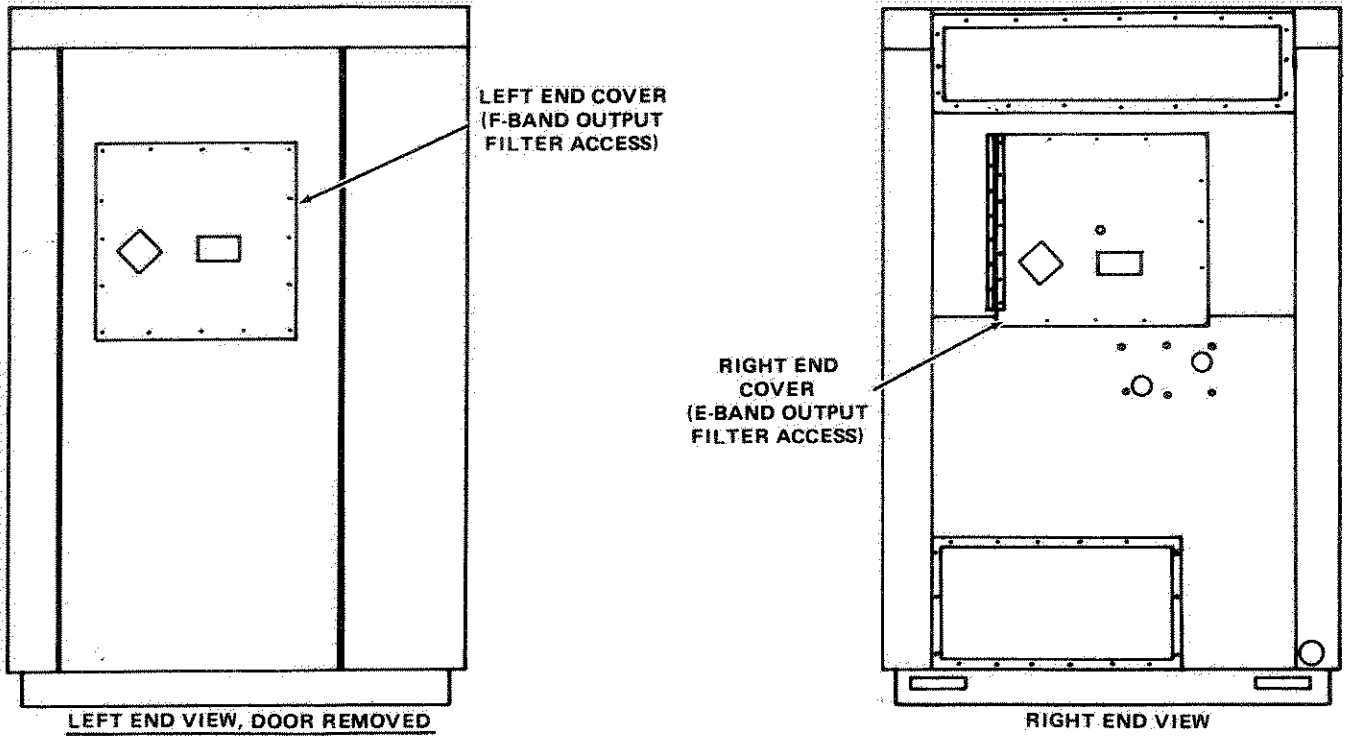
Transmitter Cabinet Doors Removed and Cover Assemblies in Place
